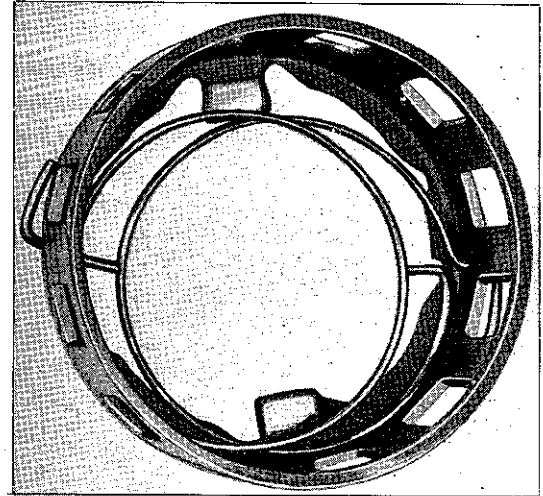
FREEWHEELING CAM RETAINER WITH SPRINGS ASSEMBLED
